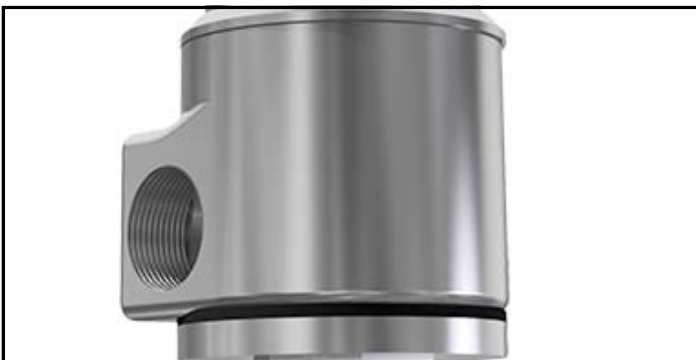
Housing base showing conduit access holes. 3/4 inch rigid body conduit is recommended. Note the large Viton O-ring seal.
